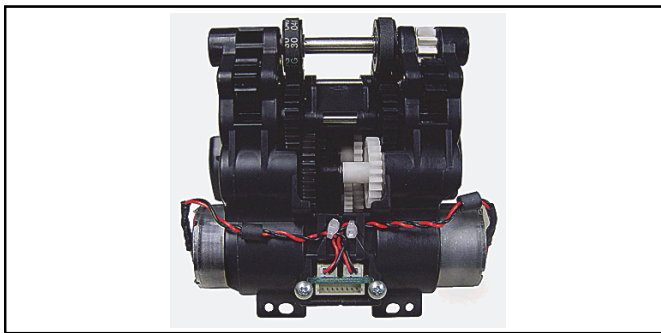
iVIZION® Motor Gear Assembly (P/N 244646)
